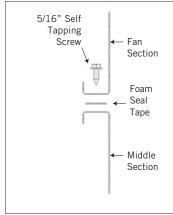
Fan/Middle Section Assembly for Optional Three-Piece Rigging
